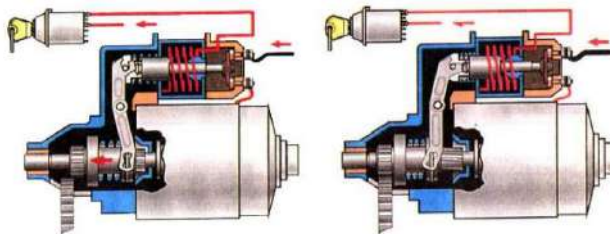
Gear engagement with the engine flywheel ring gear
